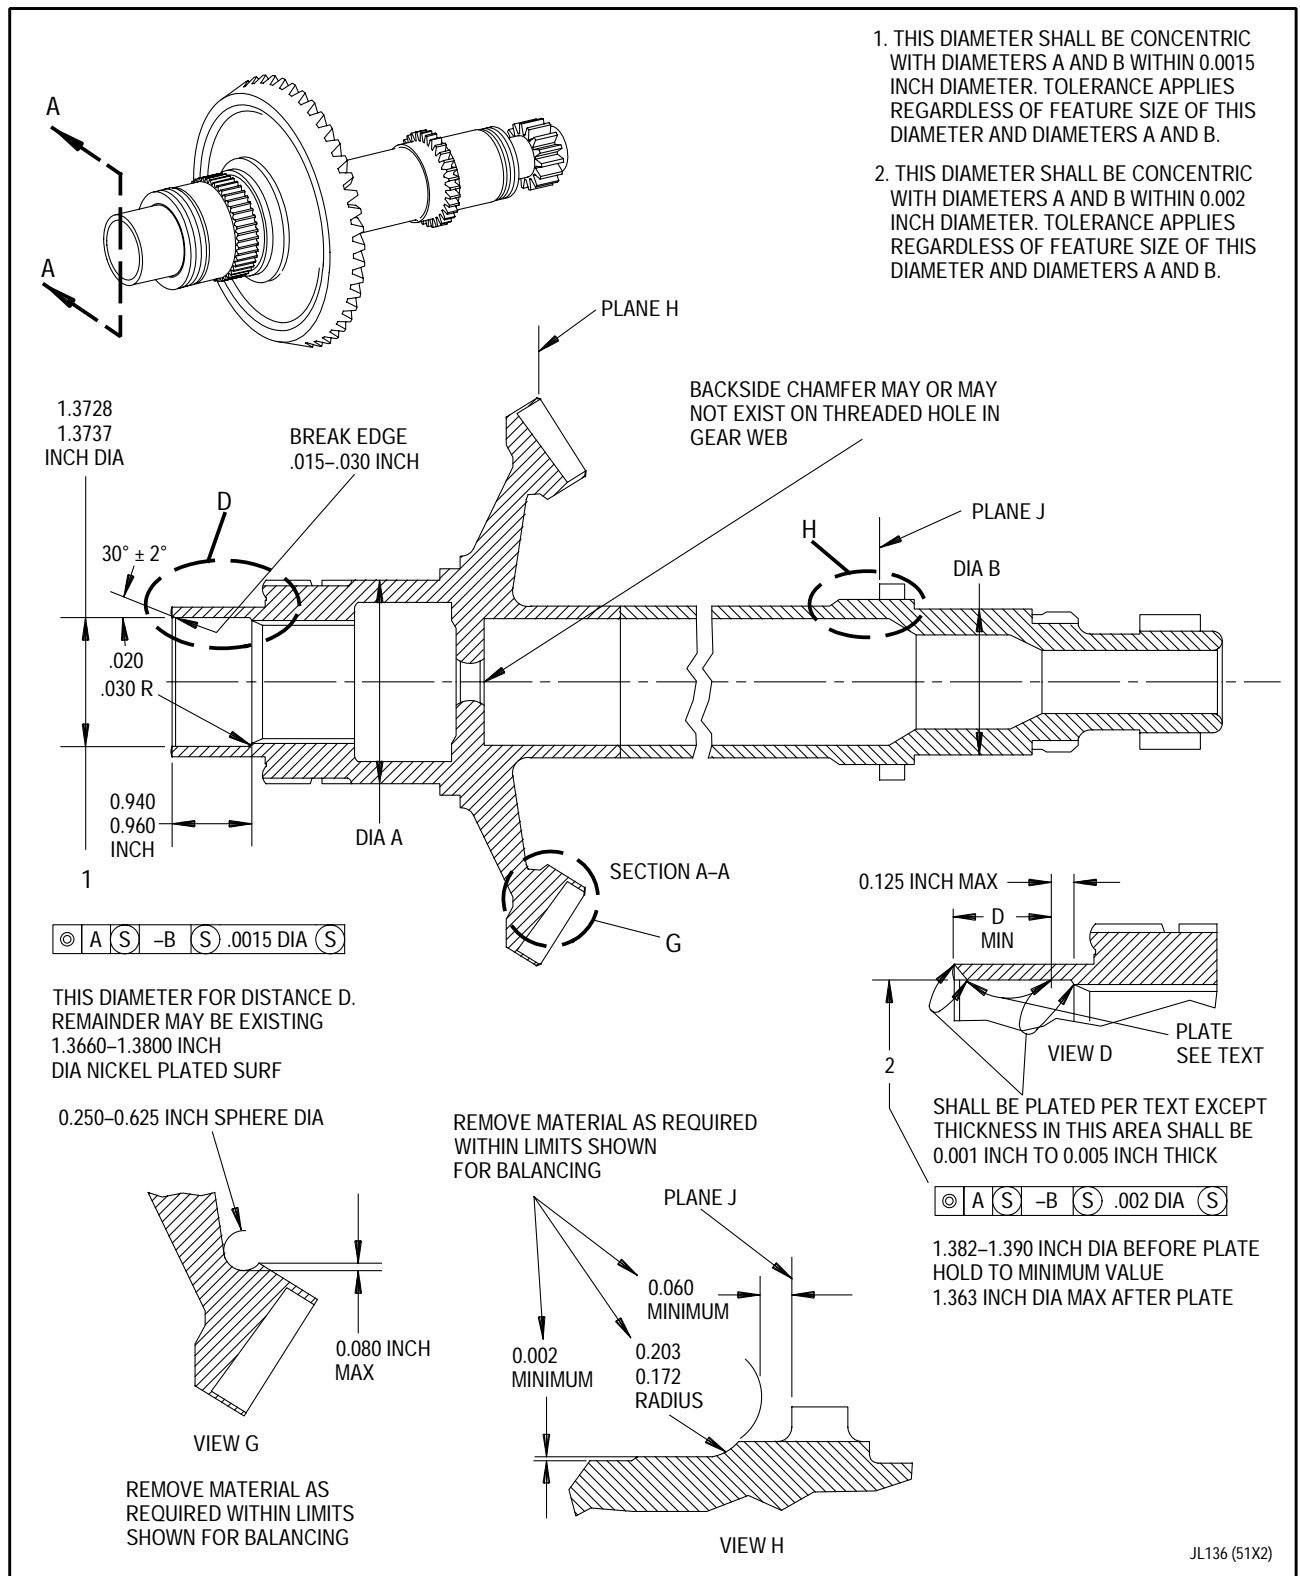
Gearbox Drive Spur Bevel Gearshaft - Repair of Inner Pilot Diameter
